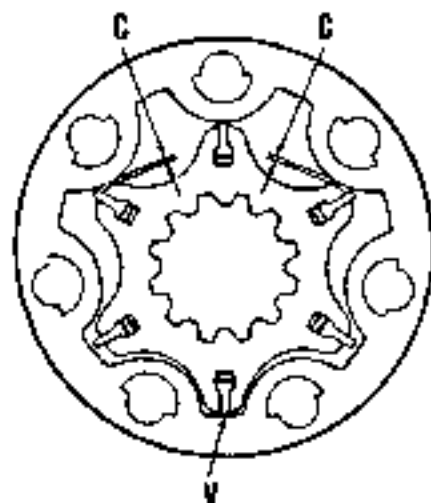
With rotor positioned in stator as shown, clearance (C) must not exceed 0.15 mm (0.006 inch). Refer to text.
